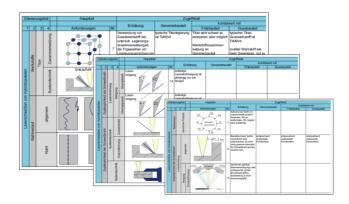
Excerpt from design catalog for laser welding-compatible component design and process preparation for joining of aluminum LAM components
